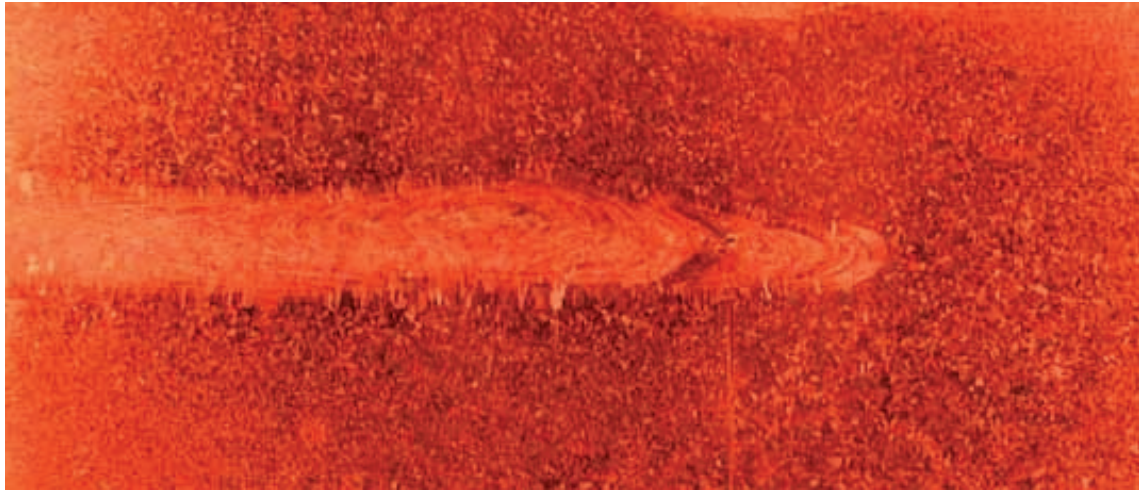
Cross-sectional photograph of sealing weld carried out at the Canister Laboratory. The surface has been etched to bring out the weld structure. Penetration depth 60 mm.
